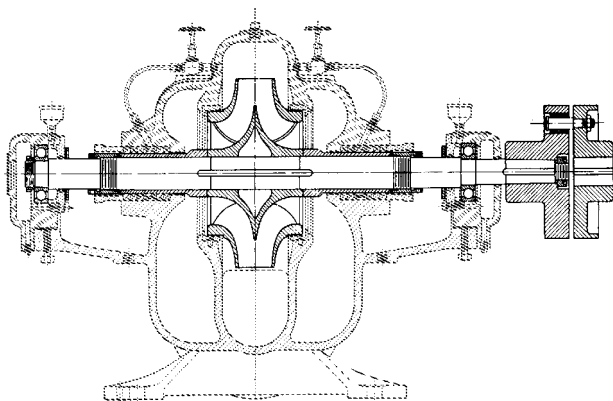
Rotor assembly of a single-stage, double-suction pump (Flowservice Corporation)
